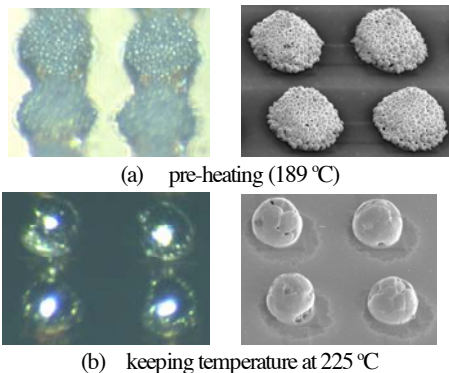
Photographs showing the shape change of the printed solder paste during reflow process (left; CCD camera, right; SEM).
